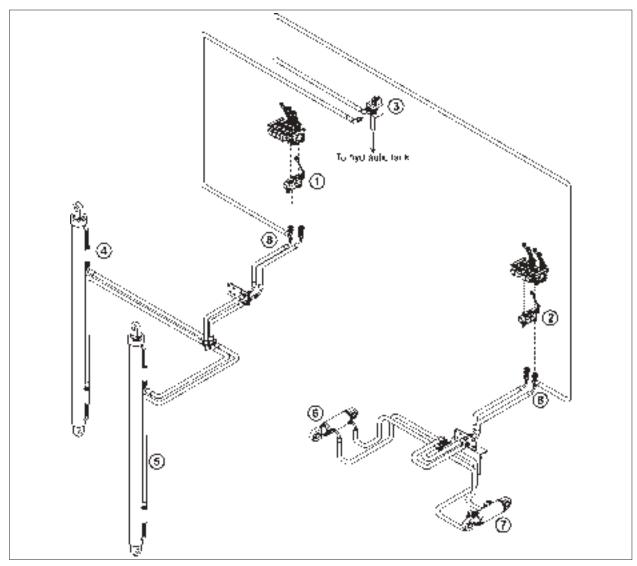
M5 / M40 LOWER AND GO HYDRAULIC SYSTEM COMPONENT LAYOUT
